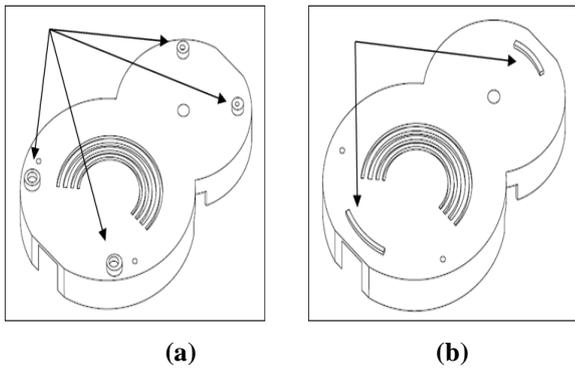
Combine rubber base to become two part by change the design (a) old design (b) new design
